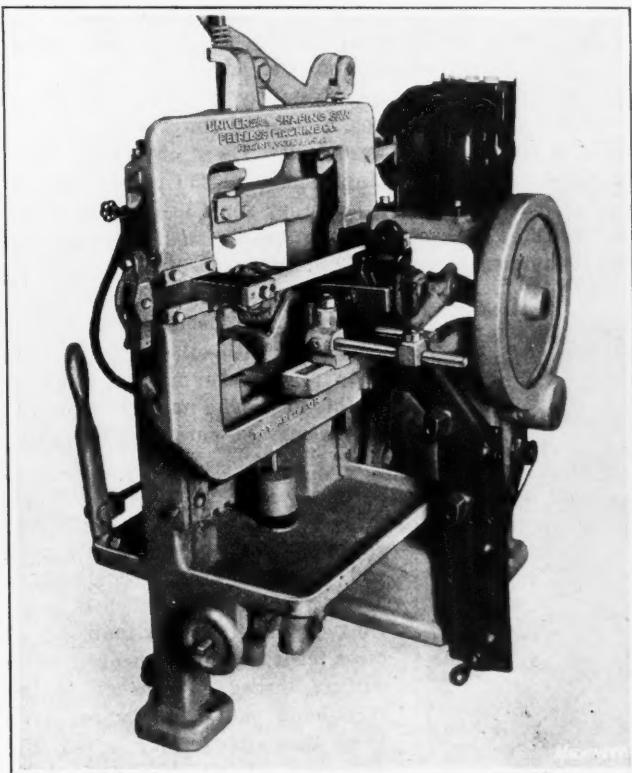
Universal Shaping Saw manufactured by the Peerless Machine Co.
